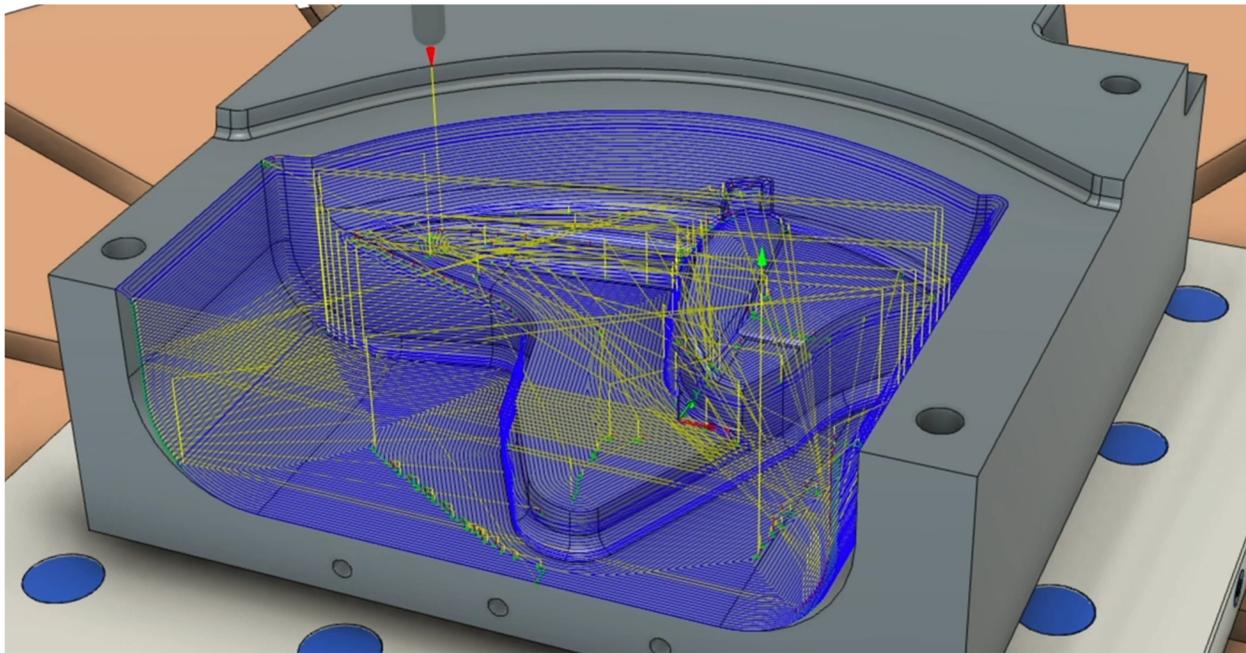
Steep and Shallow Machining on a Mold Cavity
